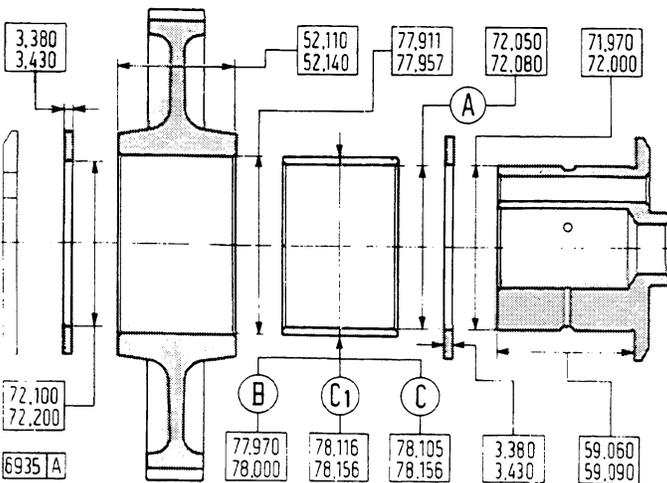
Valve Train Idler Gear and Stub Shaft Dimensions
